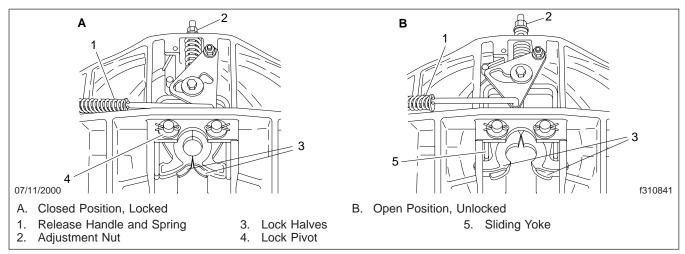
, Type "B" Kingpin Lock Mechanism (bottom view)
